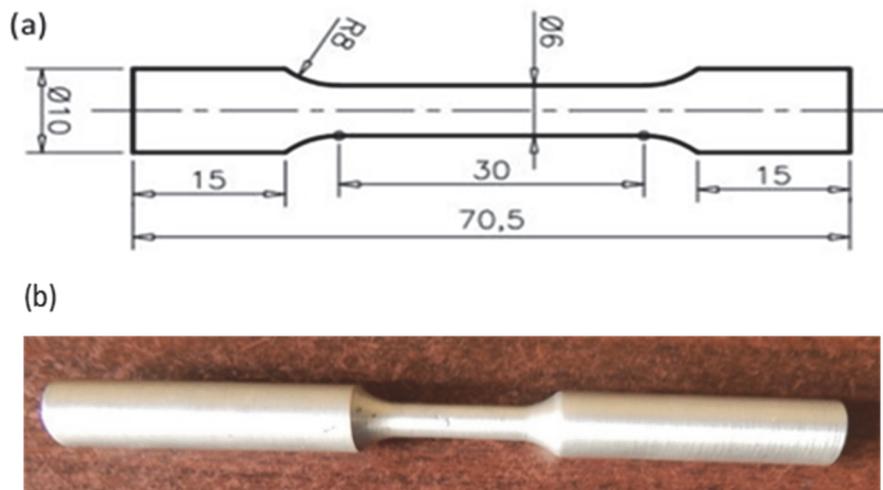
Specifications of tensile test sample (a) Dimensions of the model in mm as per ASTM E8M-16A and (b) Tensile test specimens as per ASTM E8M-16A.
